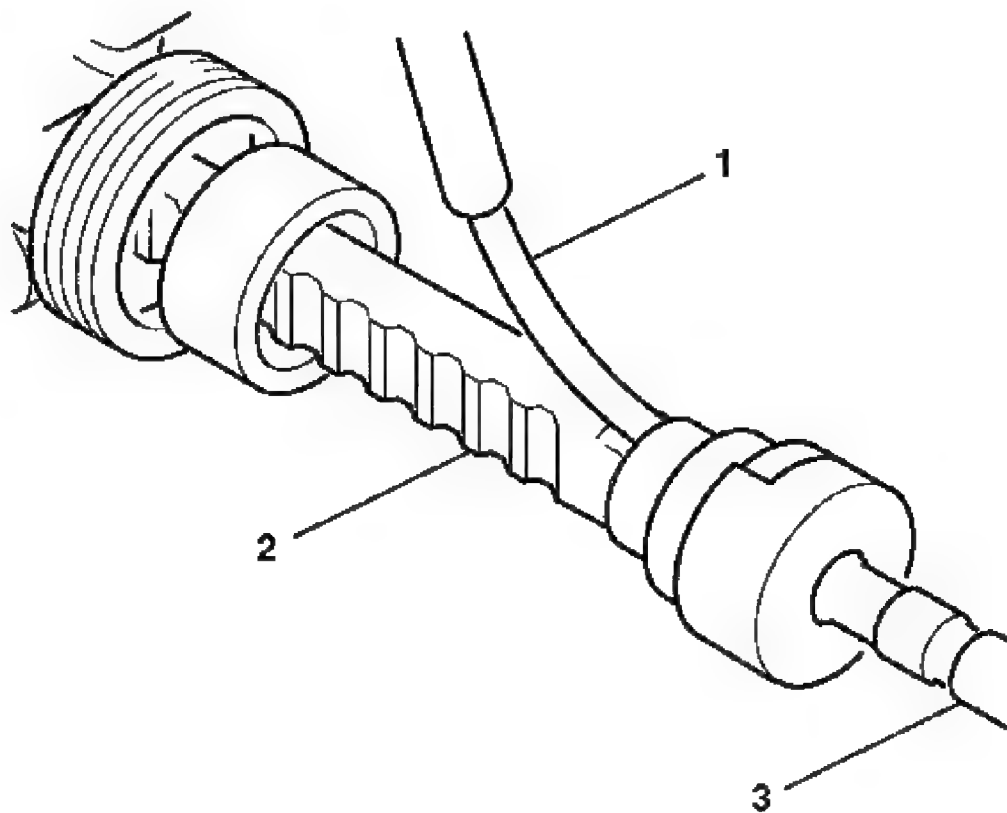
Inserting Gage Between Rack & Inner Tie Rod Housing
